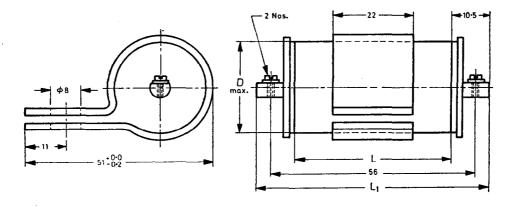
OUTLINE DRAWING AND DIMENSIONS
